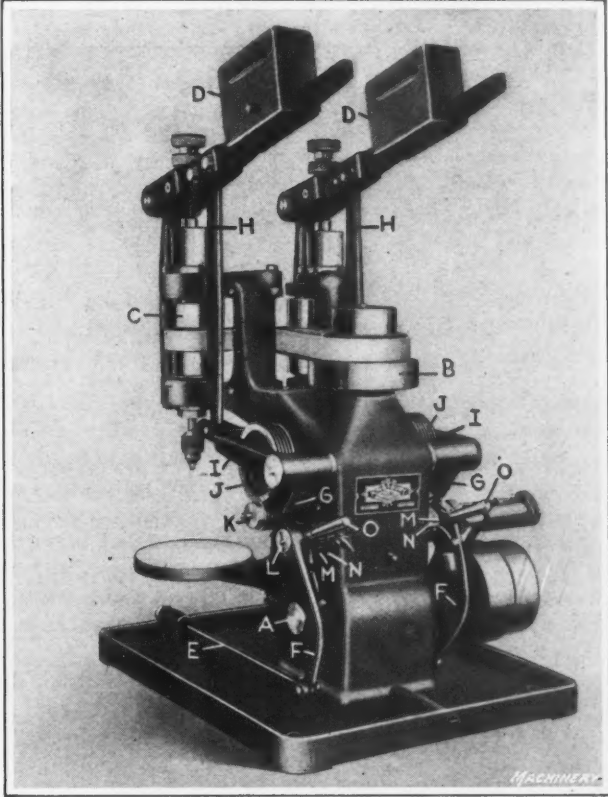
Rear View of Automatic Sensitive Drilling Machine equipped with Automatic Timing Mechanism
